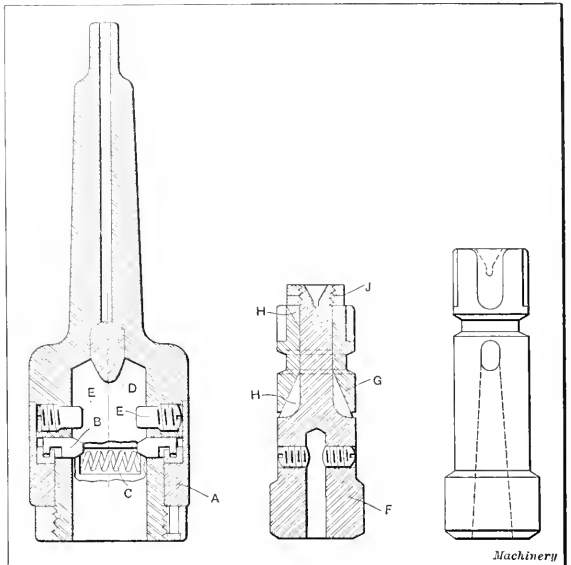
Cross-sectional View of Chuck and Tapping Collet
